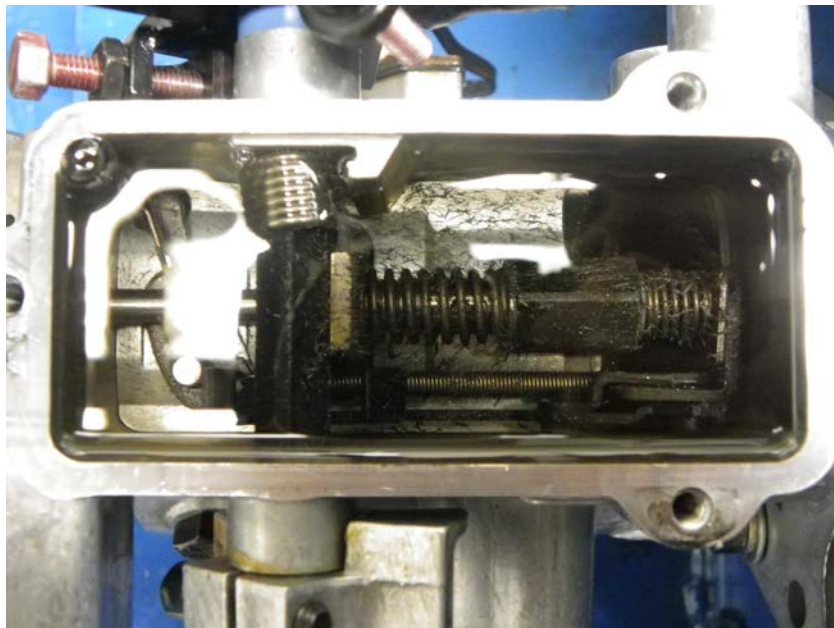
Pump SN:16756538 Governor Assembly with 1000-Hours Testing with ATJ/JP-8 Fuel
